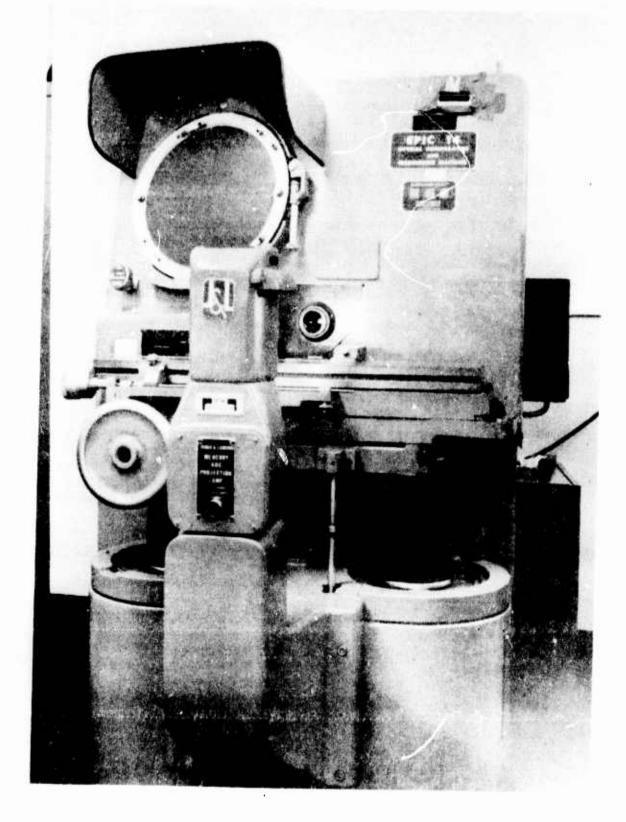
J and I. Optical Comparator Used to Check Pitch and Flank Angles of Samples 11 thru 17
